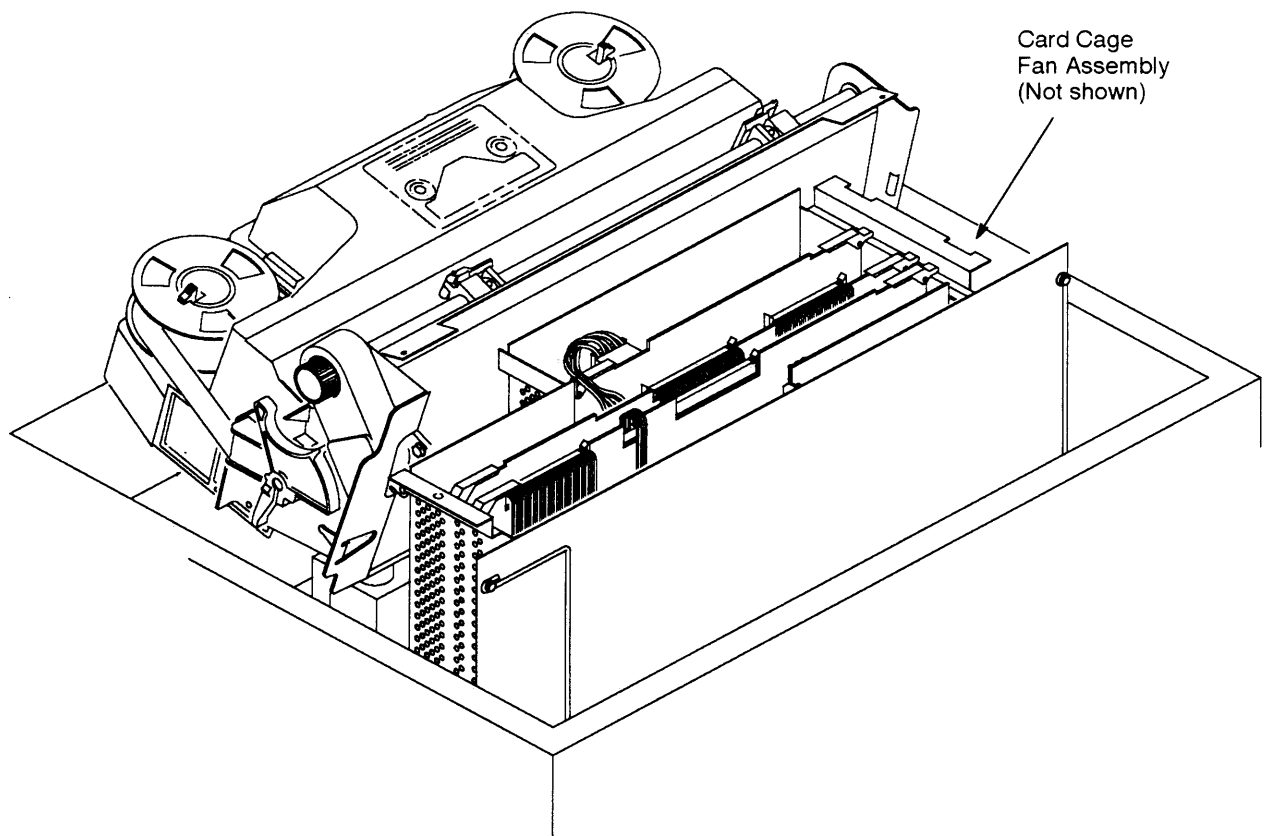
Cleaning the Shuttle Frame Assembly
